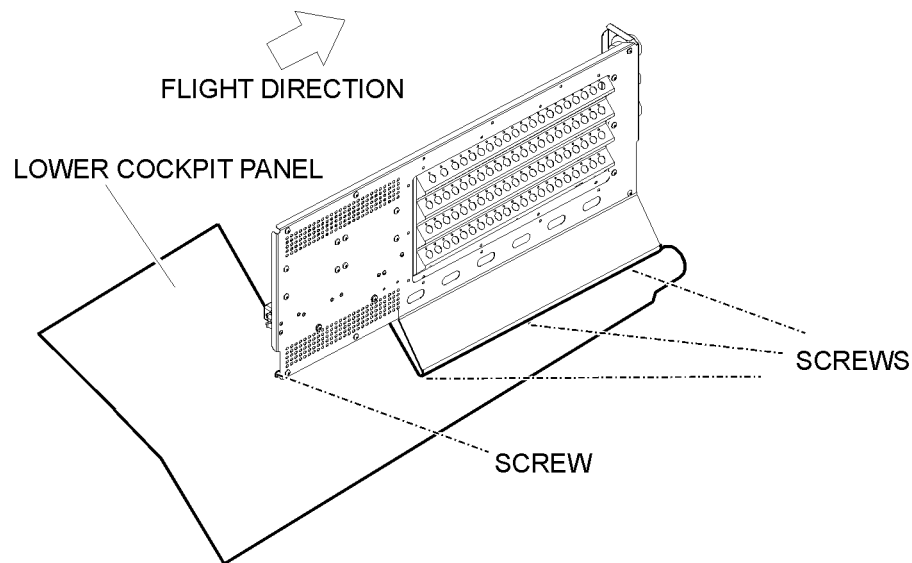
Lower Cockpit Panel (Ferry Flight Configuration) - Removal
